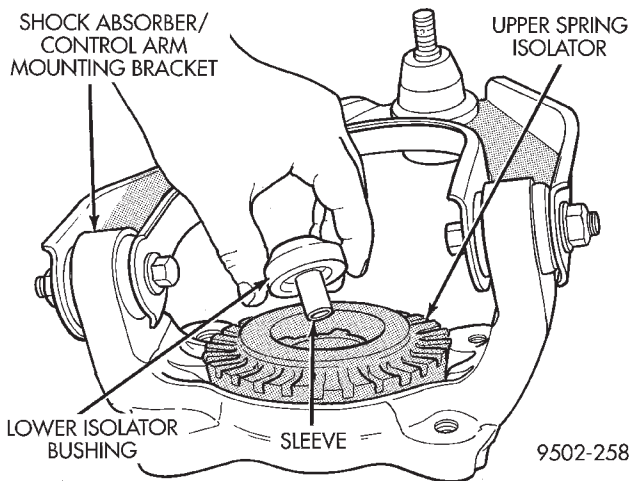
Shock Absorber Rod Lower Isolator Bushing And Sleeve
